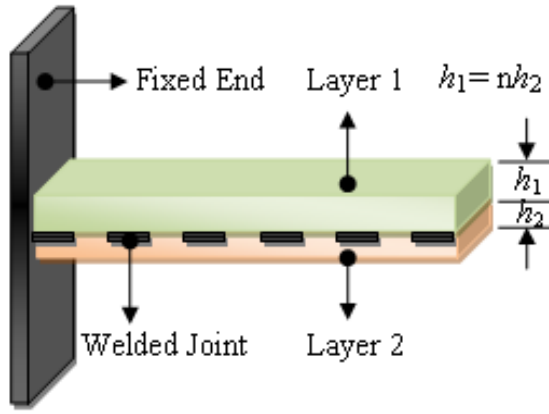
(a) Two layered tack welded cantilever beam model
